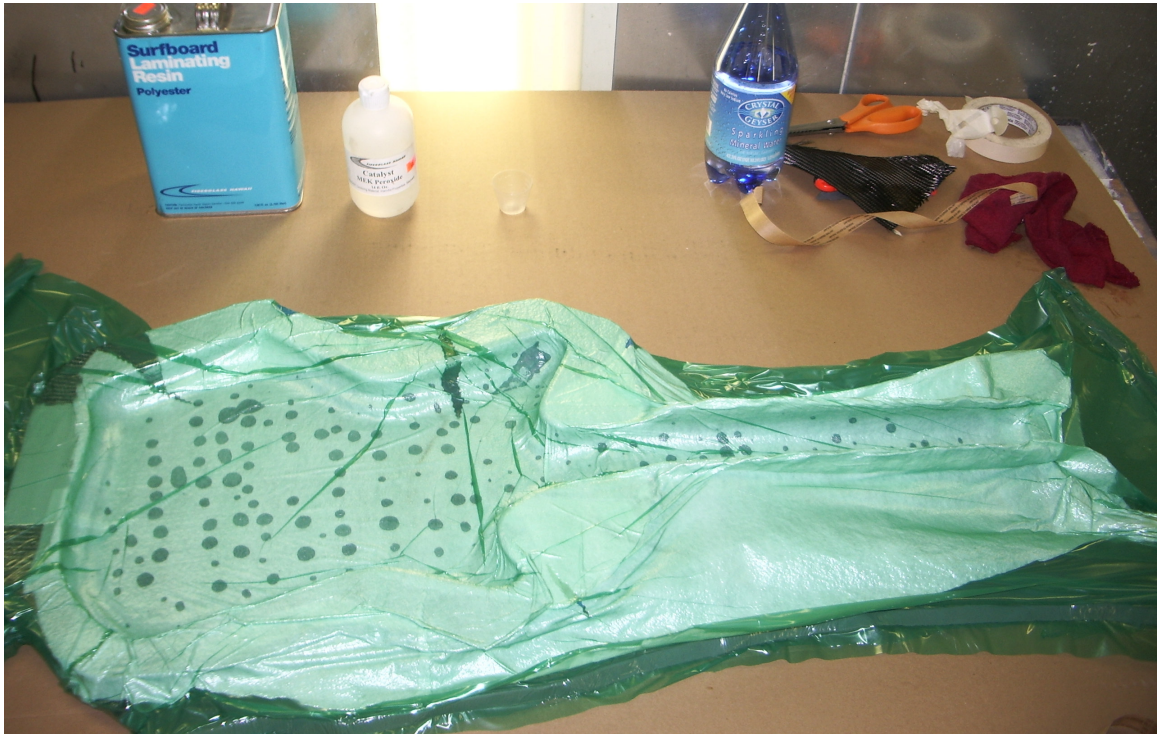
Vacuuming the Carbon-Fiber Lay-ups
